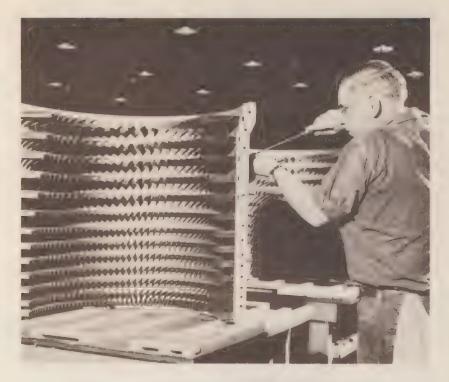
A mechanic adjusting the compressor stator of the J47.
